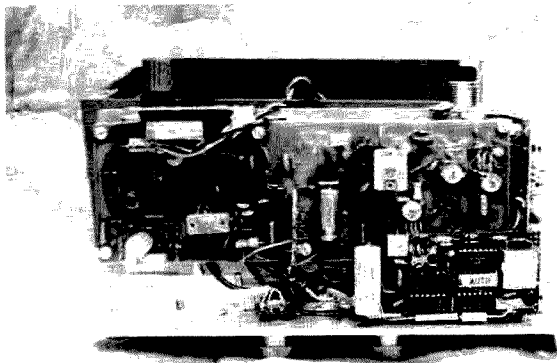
Photo B. The position of the automatic-dialer board inside the transceiver. The board is at the lower right.
